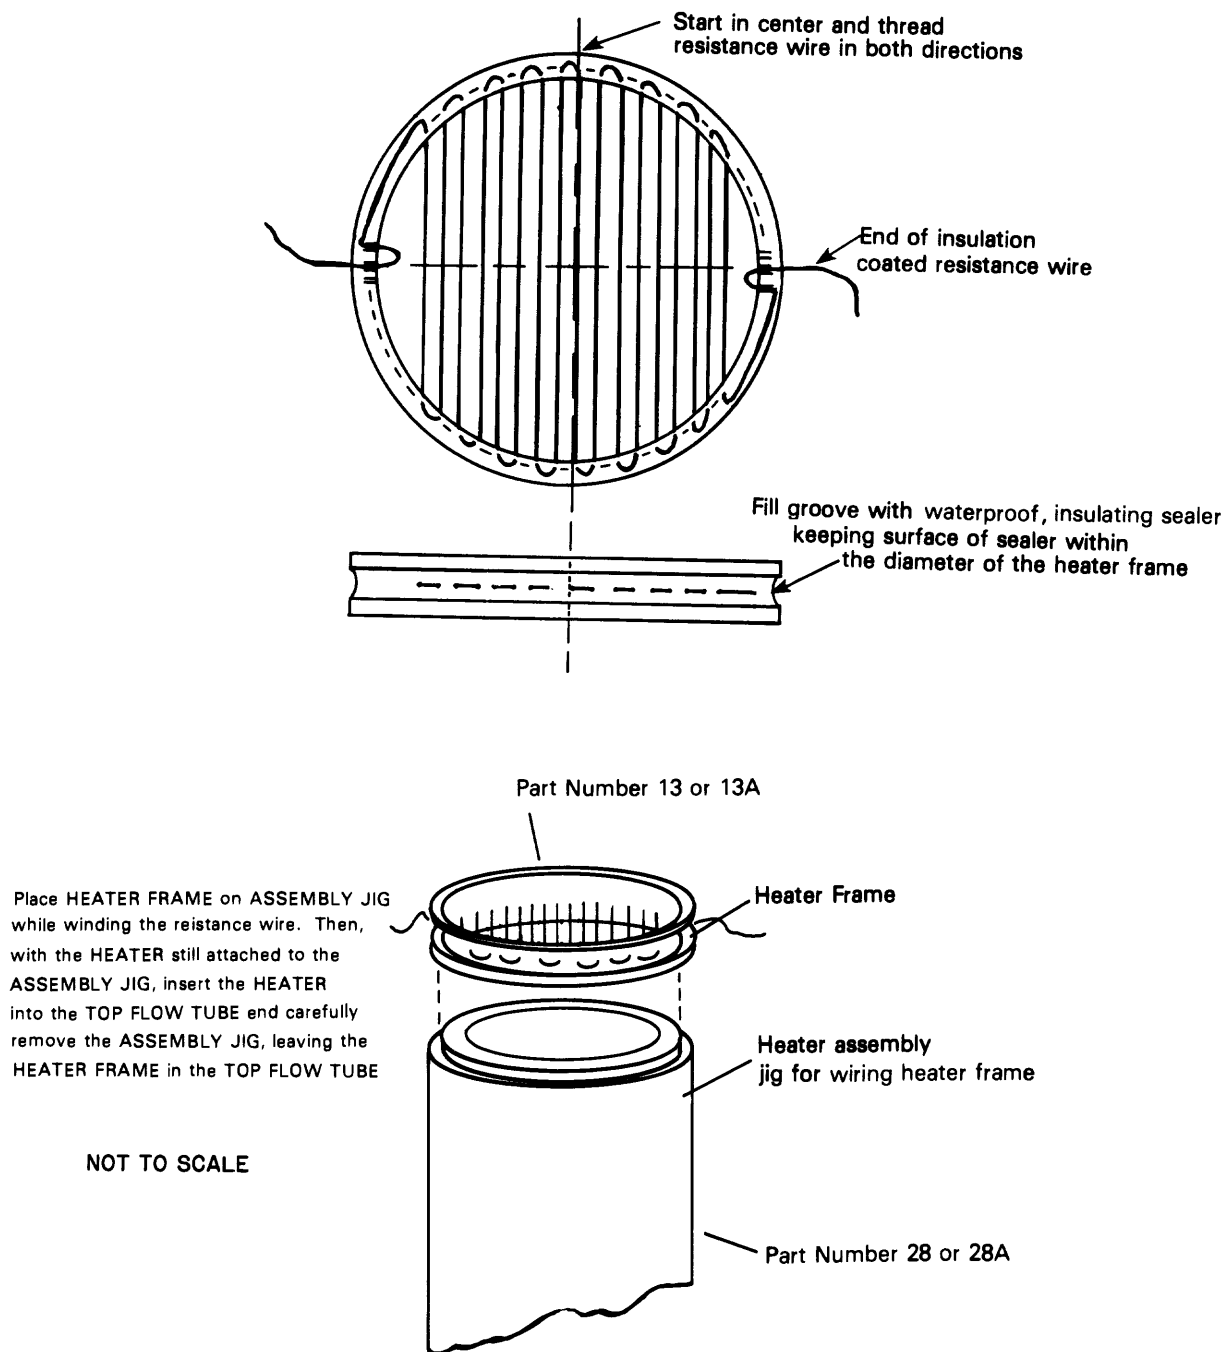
Assembly of heater (13 or 13A) using heater assembly jig (28 or 28A).
